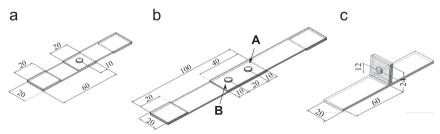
Schematic of (a) single lap shear sample with one joint, (b) single lap shear sample with two joints and (c) peeling sample with one joint.
